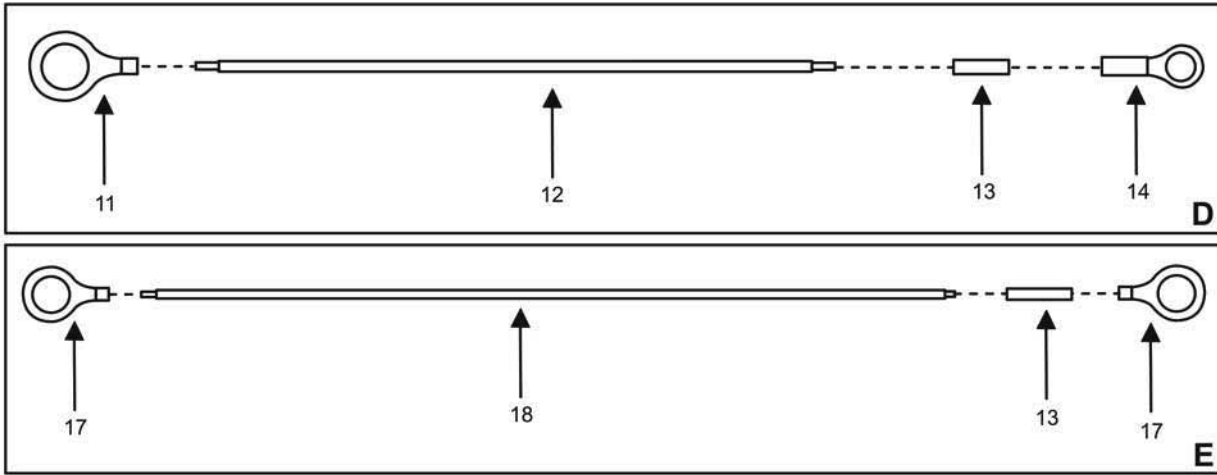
Fuel System Assembly (Sheet 4 of 6).
